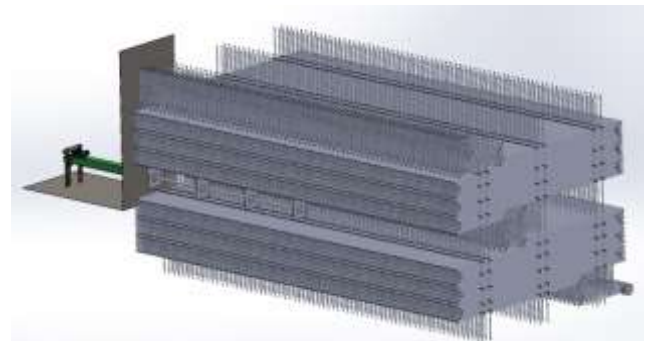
Isometric view of LRSB position in LTSH coils with supports to lance tube
